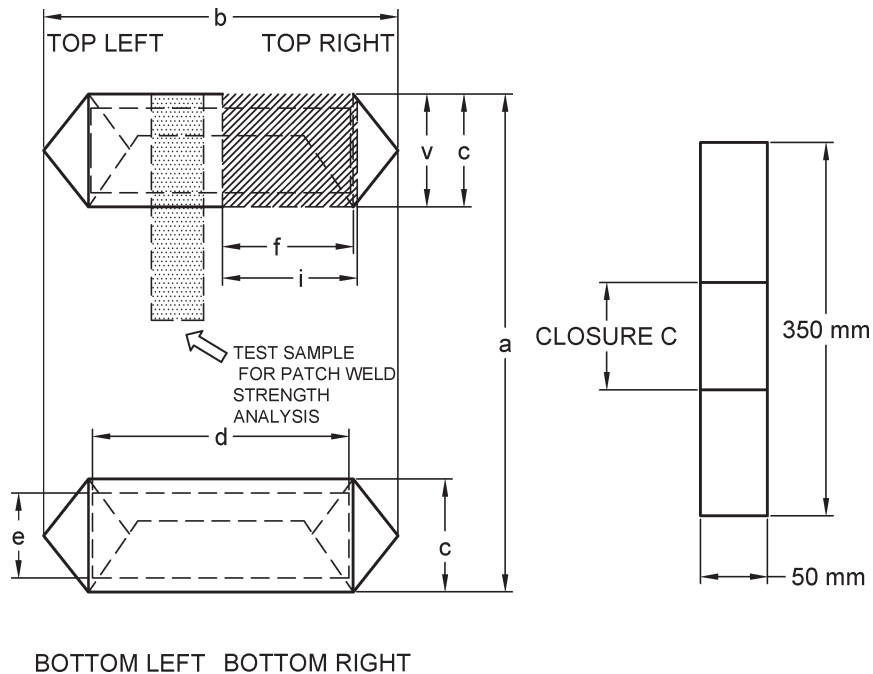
TEST SPECIMEN FOR TOP AND BOTTOM CLOSURE PATCH WELD STRENGTH TEST
